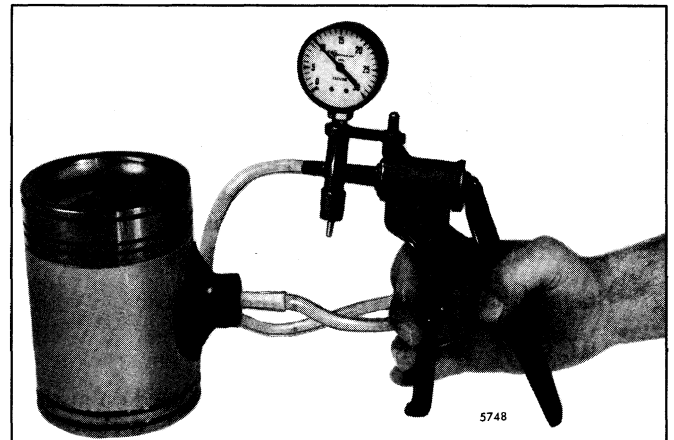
Checking Piston Pin Retainer for Proper Sealing using Tool J 23738 and Adaptor J 24629
